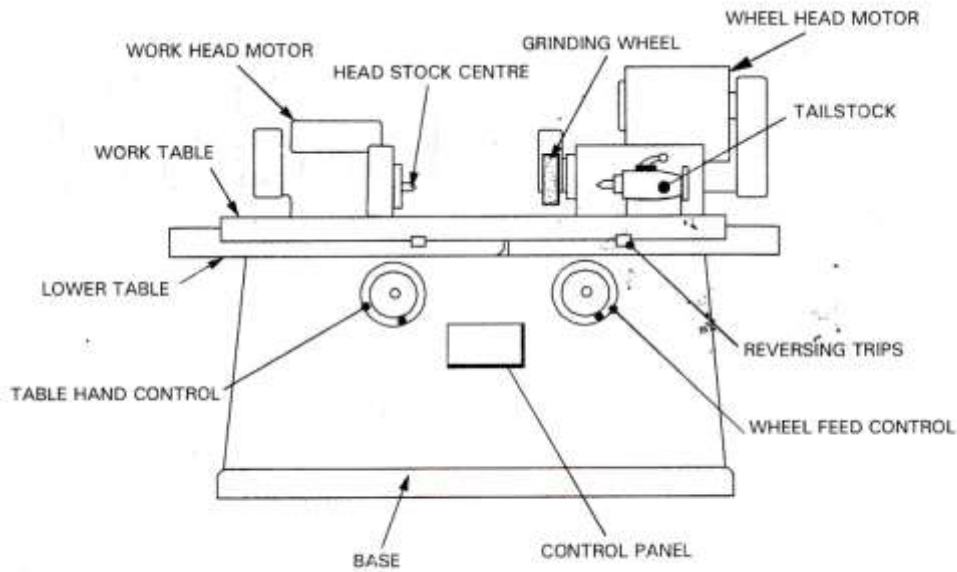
CYLINDRICAL GRINDING MACHINE
